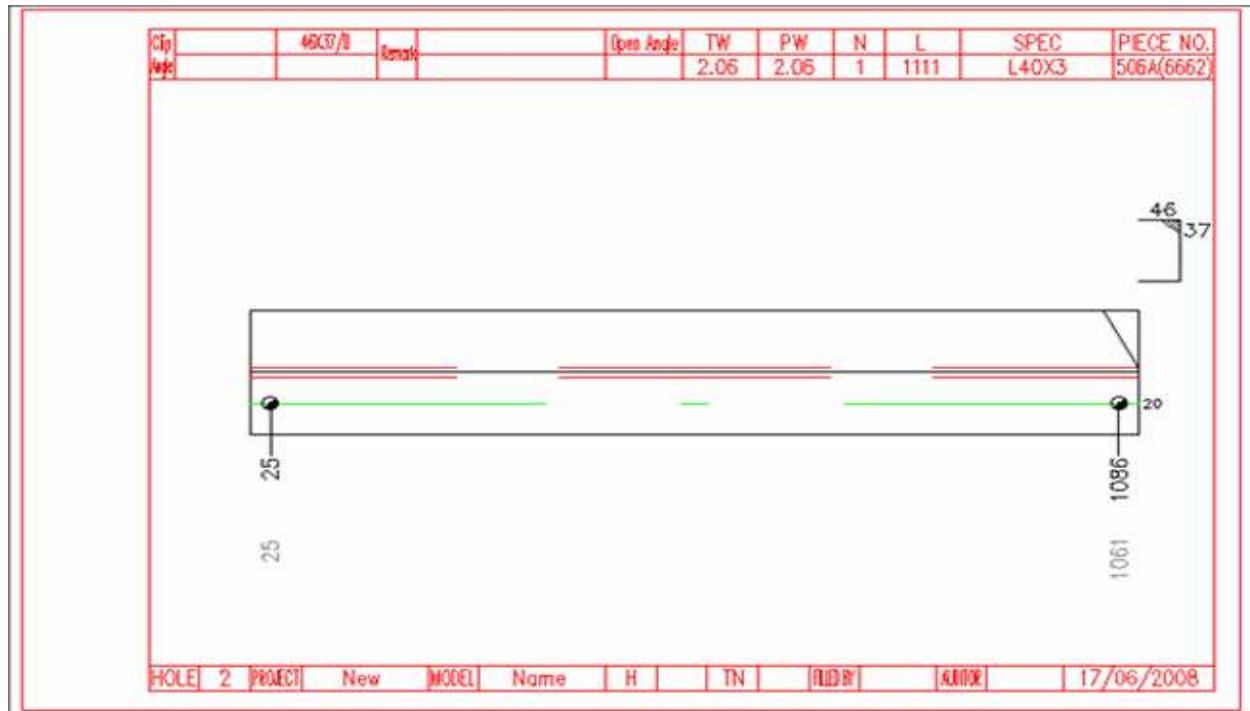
Drawing sample of a tower part (Daopower company, 2012)
